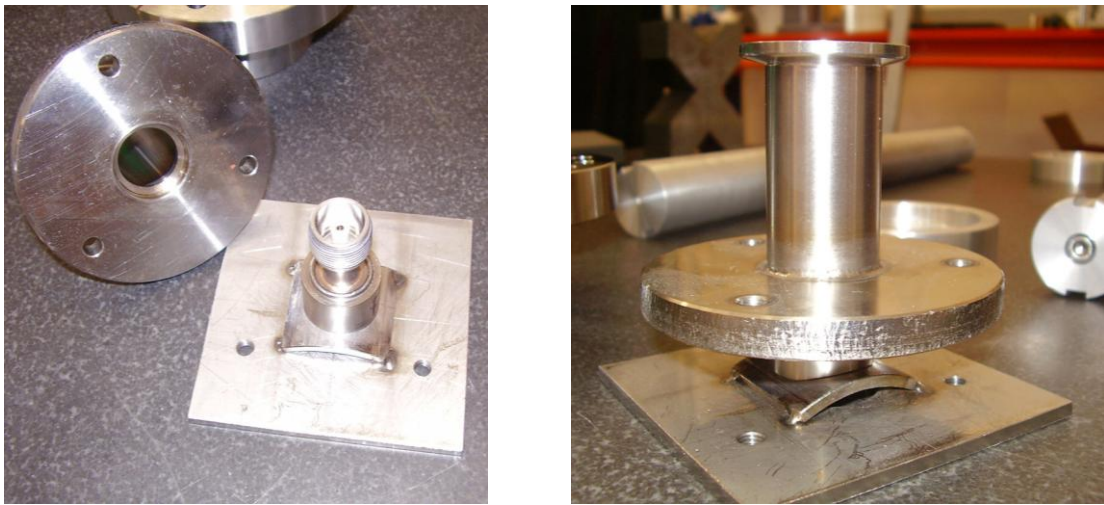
Transition designed to test the feedthroughs before final welding
